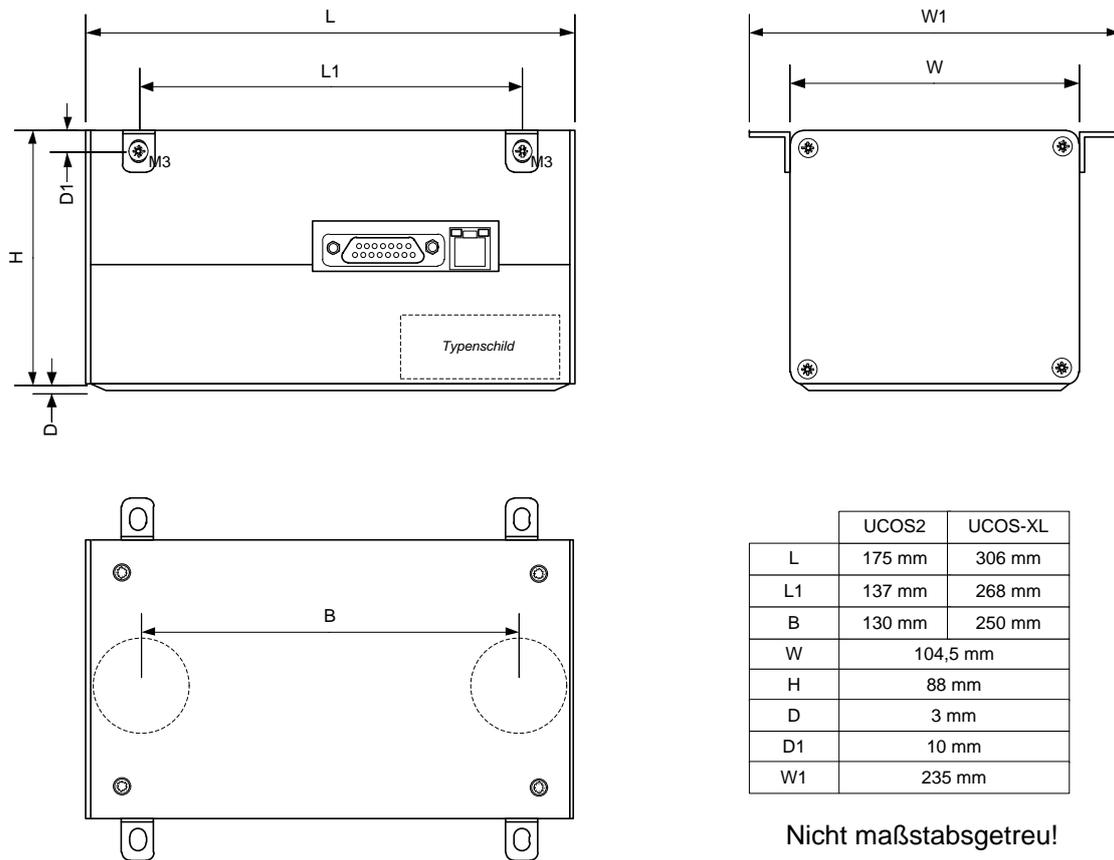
UCOS2XL technical drawing with dimensions in mm.
